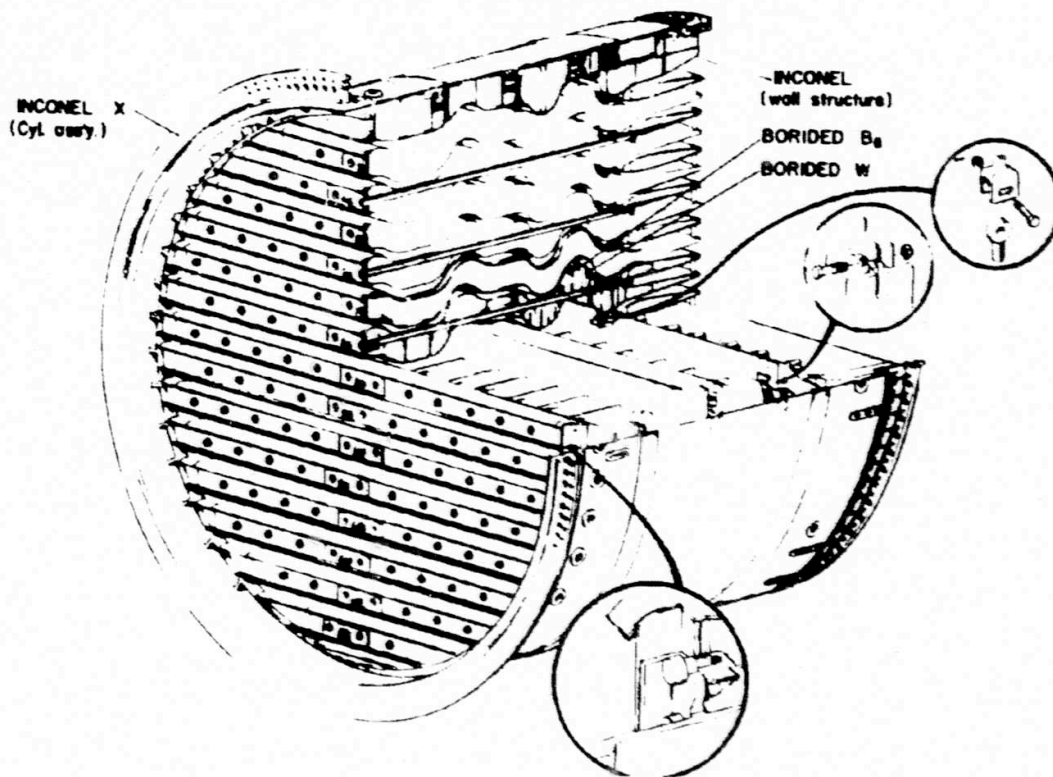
XMA-1A front shield (Dwg G-1284-A)
